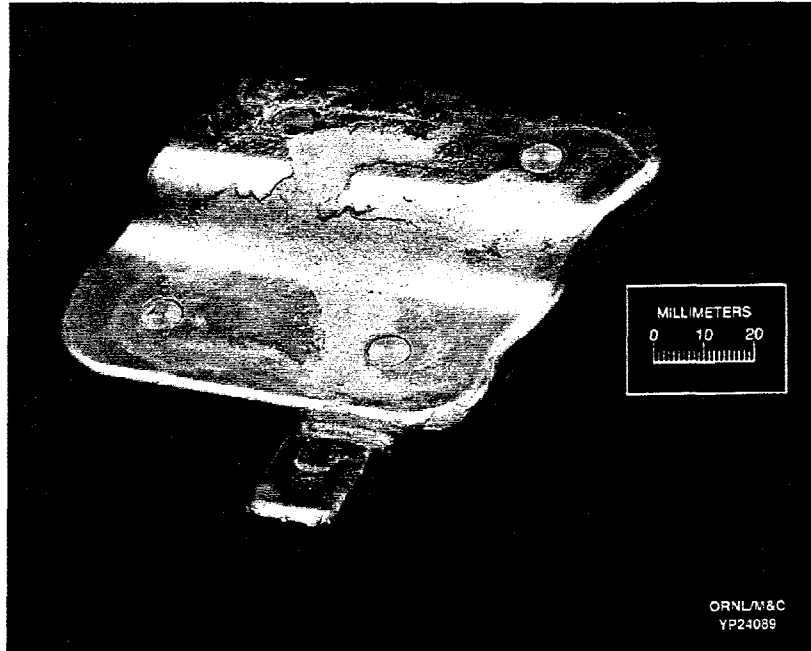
Motor mount bracket produced using the initial gating system design exhibiting severe surface defects.
